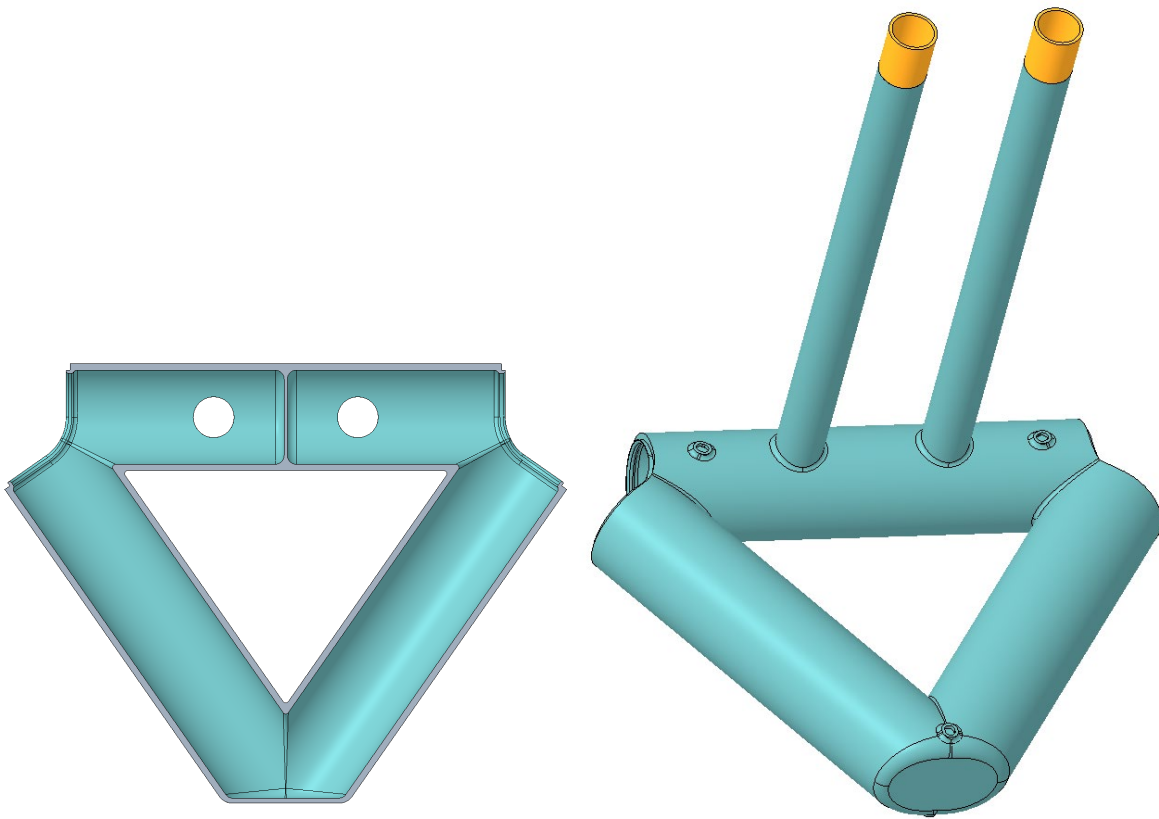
Tube Hydrogen Vessel Body machined after friction welding of Invar transition pieces to Al 6061-T6 Forging
